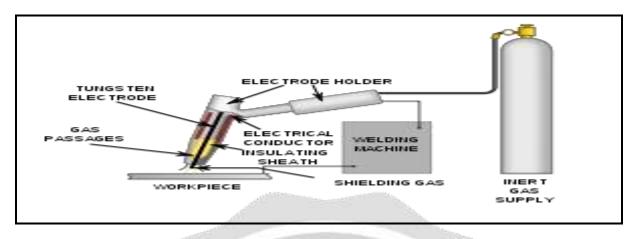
Schematic Diagram of TIG Welding Process [14]
